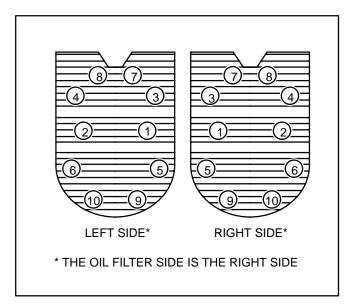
CYLINDER HEAD BOLT TORQUE SEQUENCE
